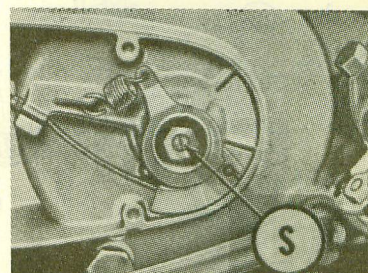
The clutch adjusting screw (S) is located under the cover on left side of engine.
